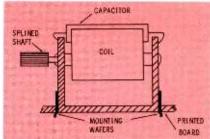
Mounting details for the horizontal-oscillator coil in Sylvania TV.
